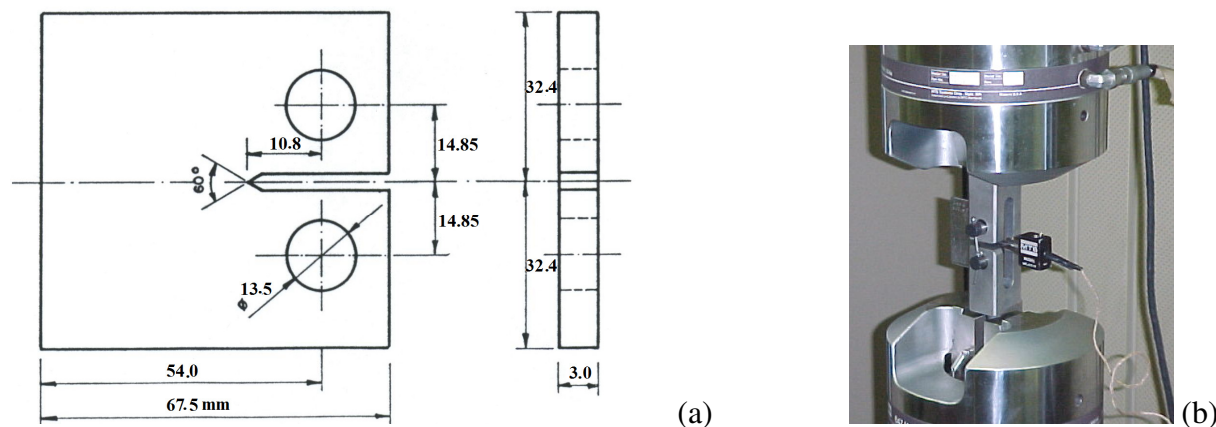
(a) C(T) specimen. Dimensions in mm and (b) detail of the specimen fixed in the grips of MTS testing machine.
